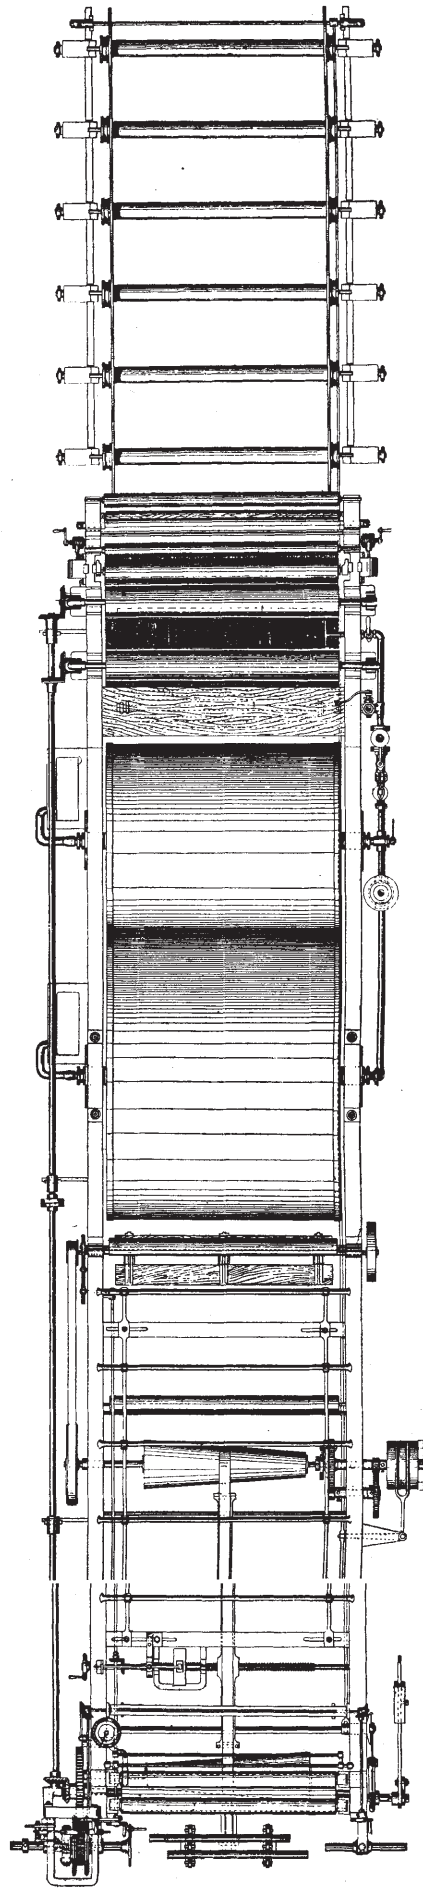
(b).—SLASHER OR TAPE (Cylinder-Drying) SIZING MACHINE (Plan).
